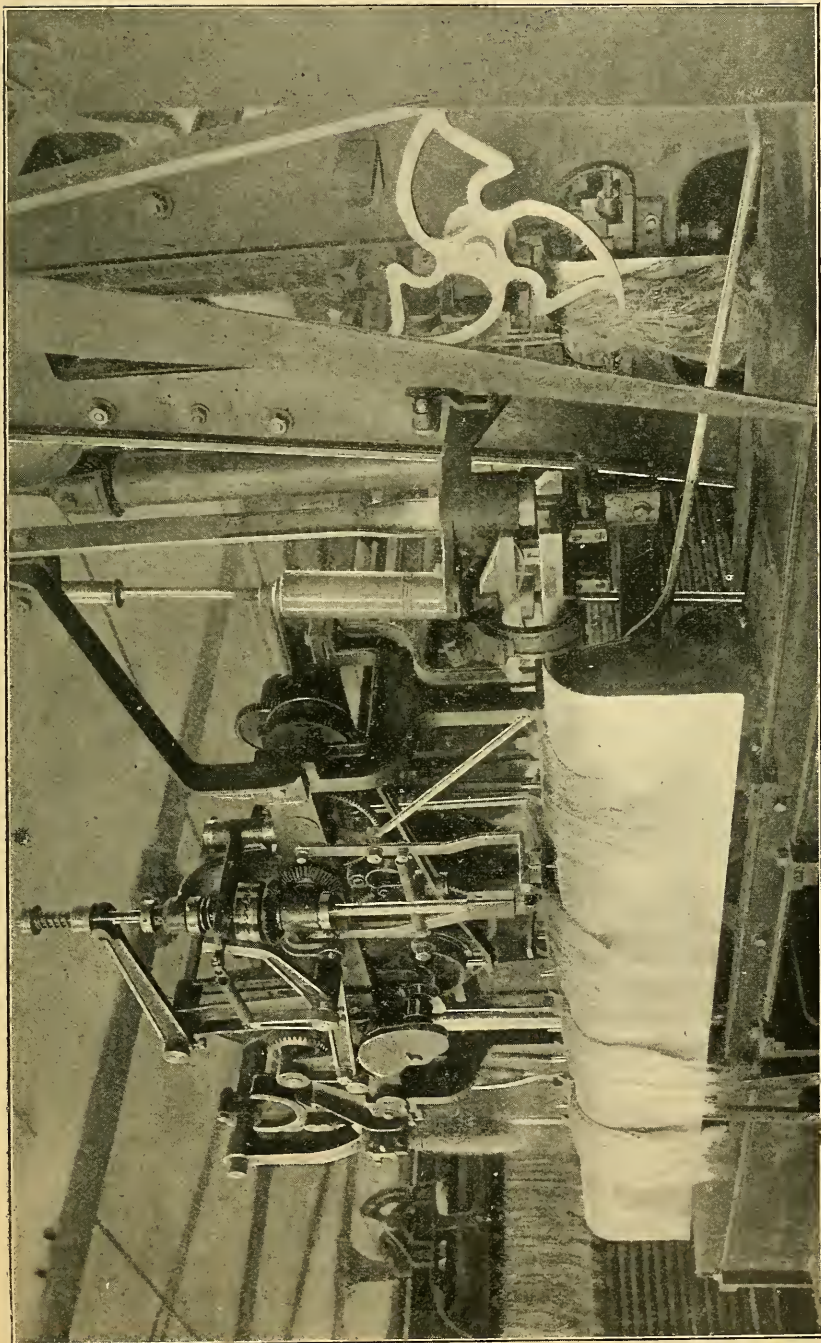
Reade, Crawford, & M'Kibbin's patent automatic screwing for hackling machines. (Changing end.)
